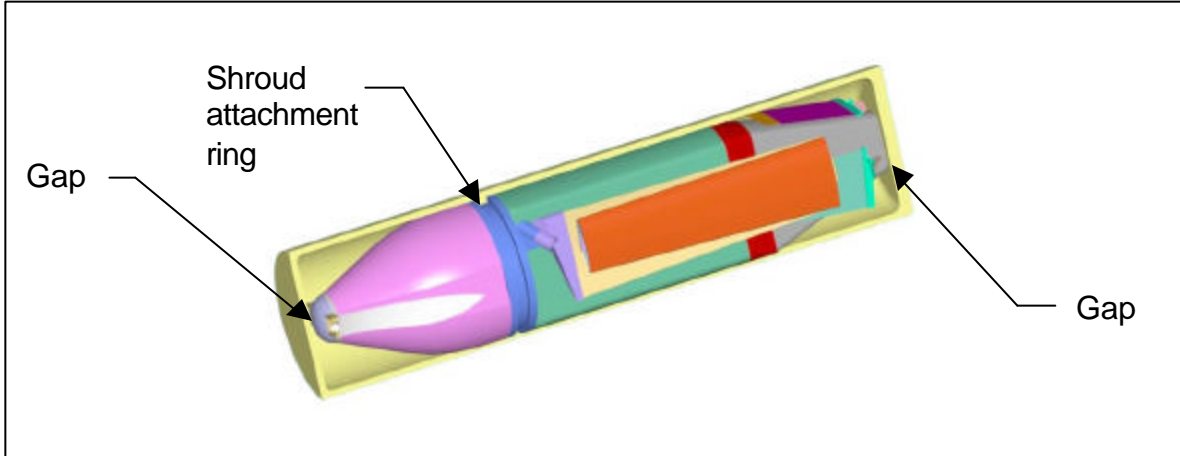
Protective shroud surrounding WASP II vehicle²
